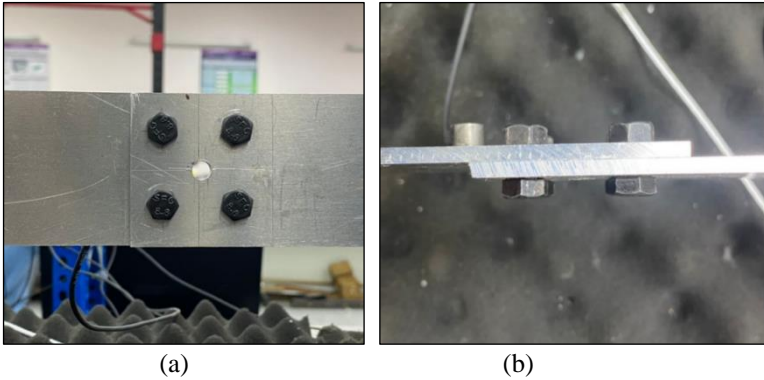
M5 bolt assembly for the bolted beam (a) top view and (b) side view
